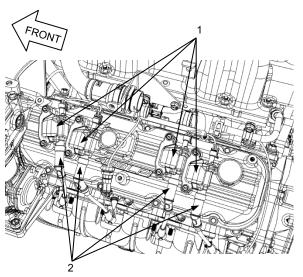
Ignition Coils (1) and Spark Plug Wires (2). NOTE: *Driver side shown; passenger side similar.
